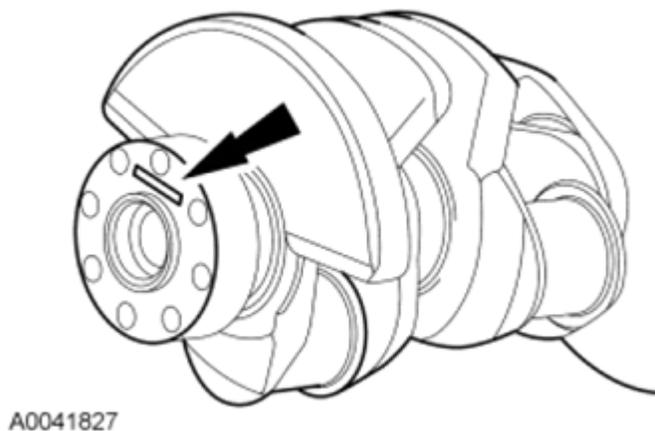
Locating Main Bearing Code Found On Back Of Crankshaft
